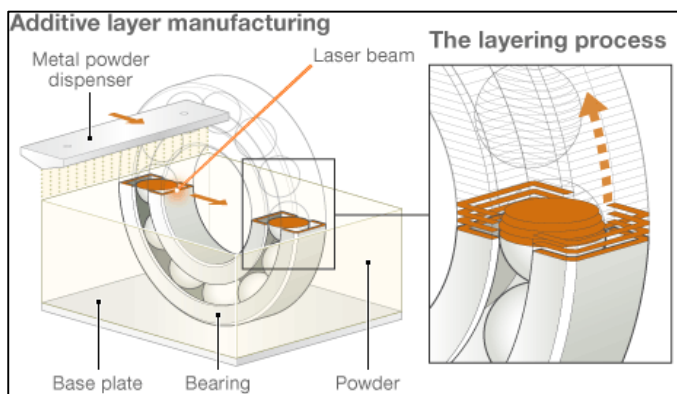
3-D printed bearing. The parts could not be assembled if it wasn't 3-D printed. (*The Free Beginner's Guide to 3d Printing* 3dprintingindustry.com)
